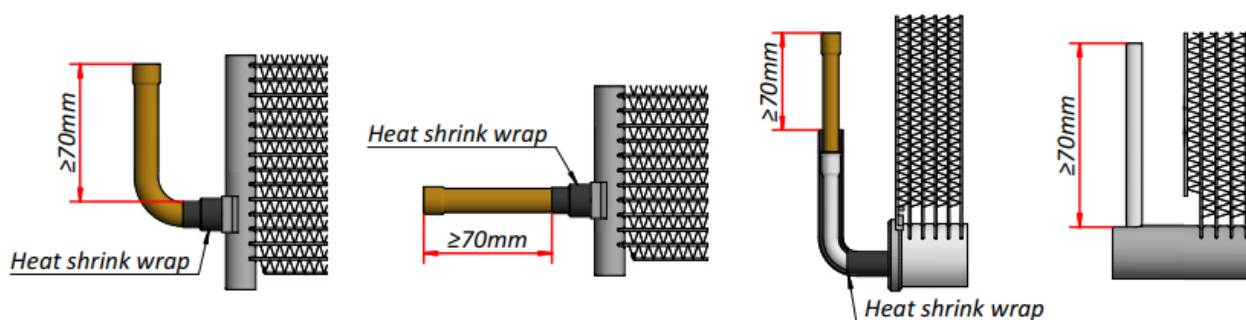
The pipe length after the braze joint should be longer than 70mm.
